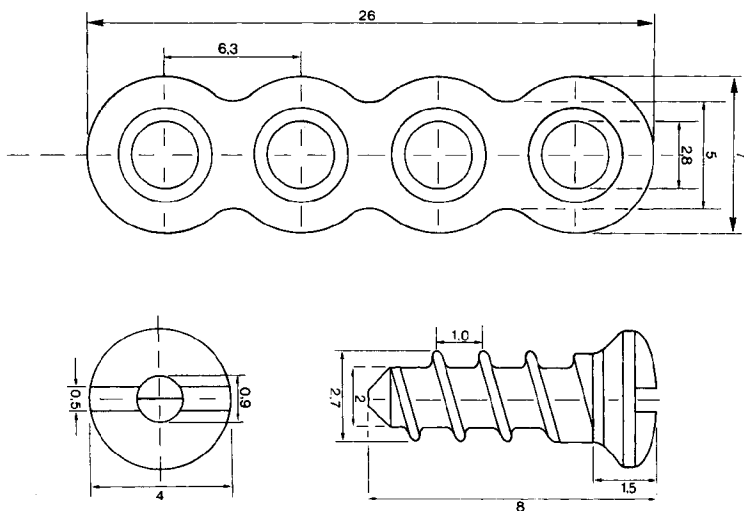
Dimensions of the PDLLA/P(TMC-CL) bone plate and screw (mm).
